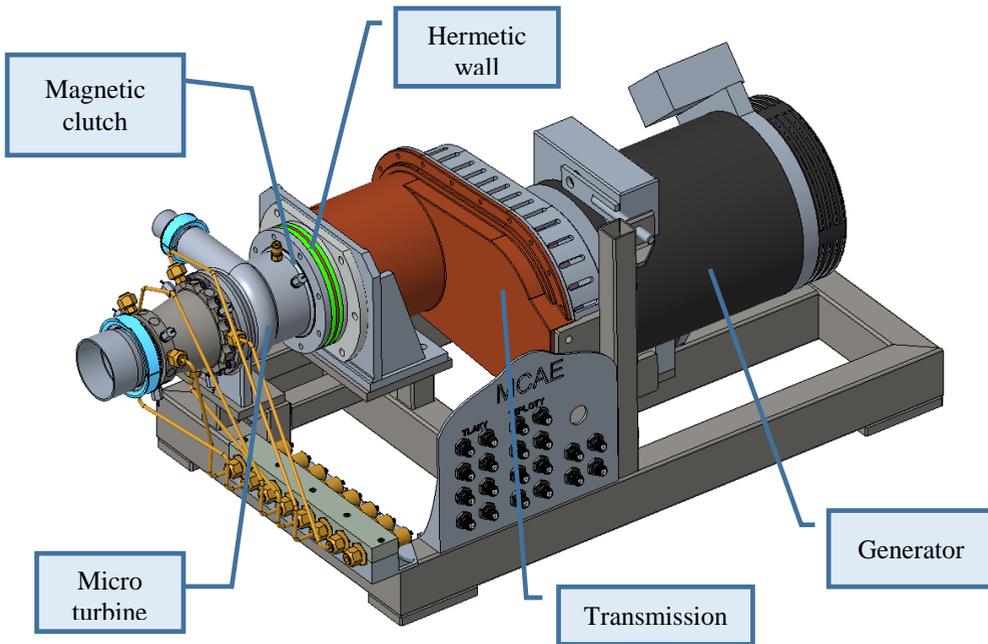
Example of a 1.5 kW micro turbine with magnetic clutch, gearbox and generator.
